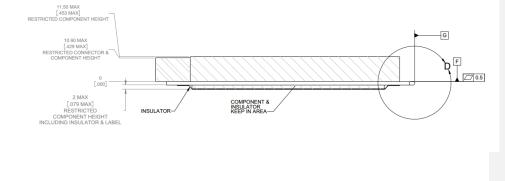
Large Form Factor Keep Out Zone – Bottom View
